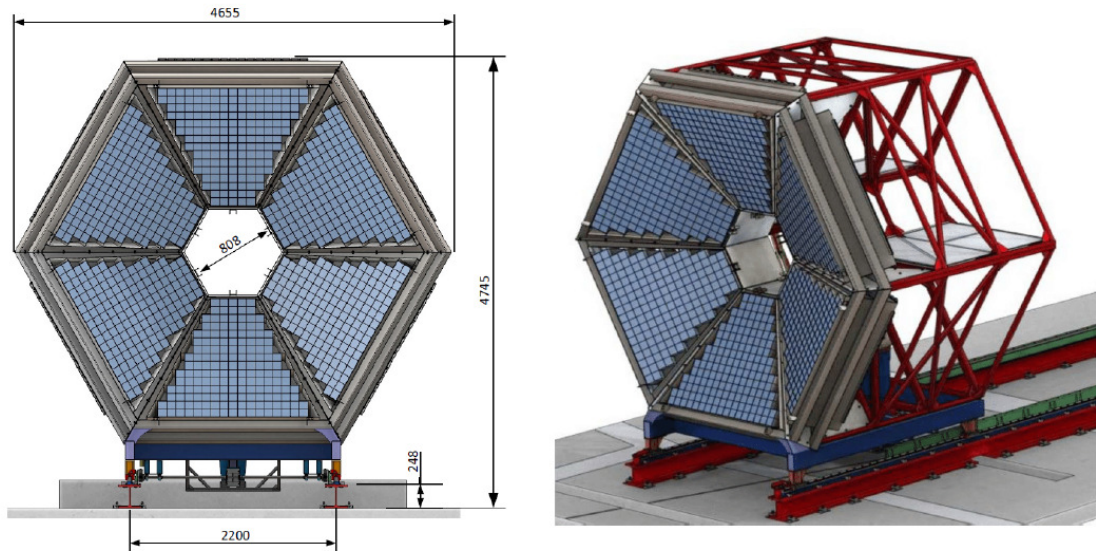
Left: Dimensions of the HADES electromagnetic calorimeter, front view. Right: Final assembly of the drive system and detector modules [127].
